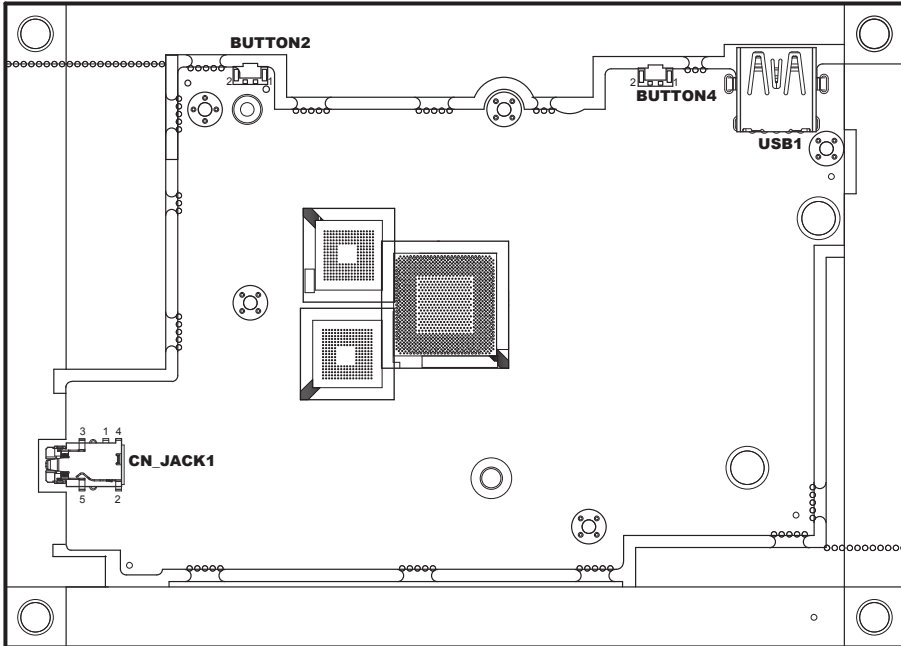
MB-5102 Main Board Component Locations (Top View)
